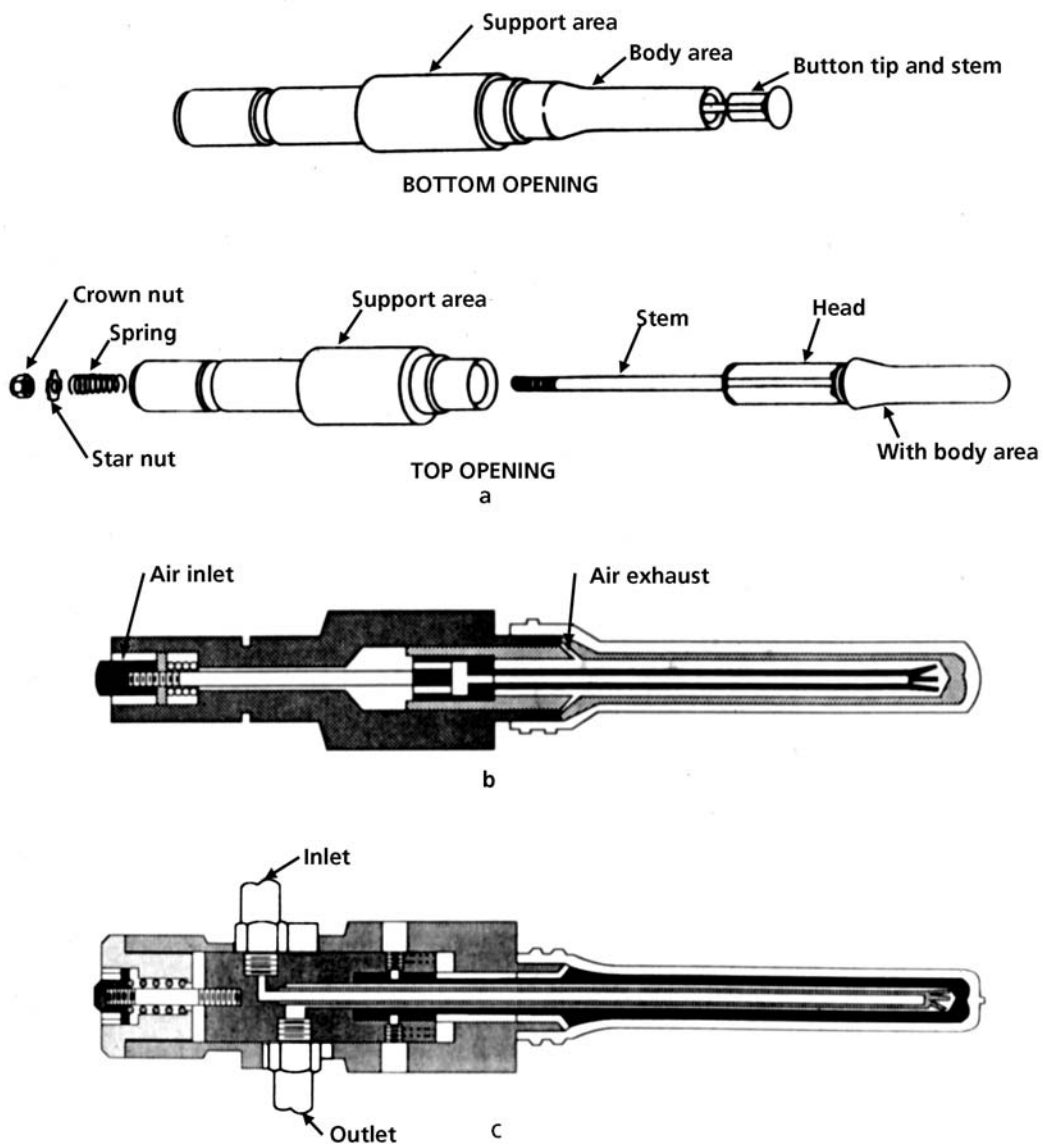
Core rod assembly. a = Exploded view; b = Section showing open position; c = Section showing closed position
